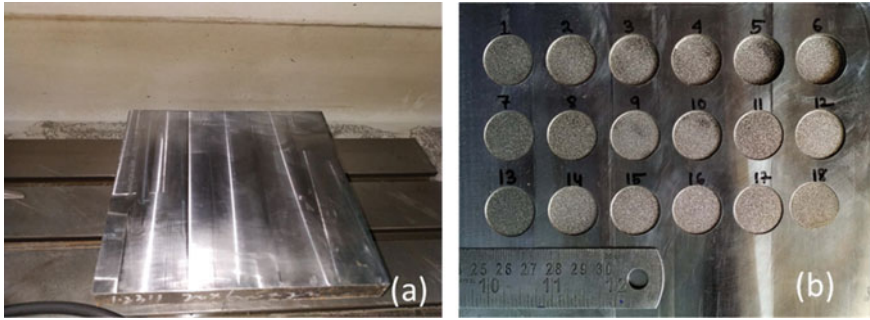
a Workpiece before and b workpiece after electro-discharge machining
